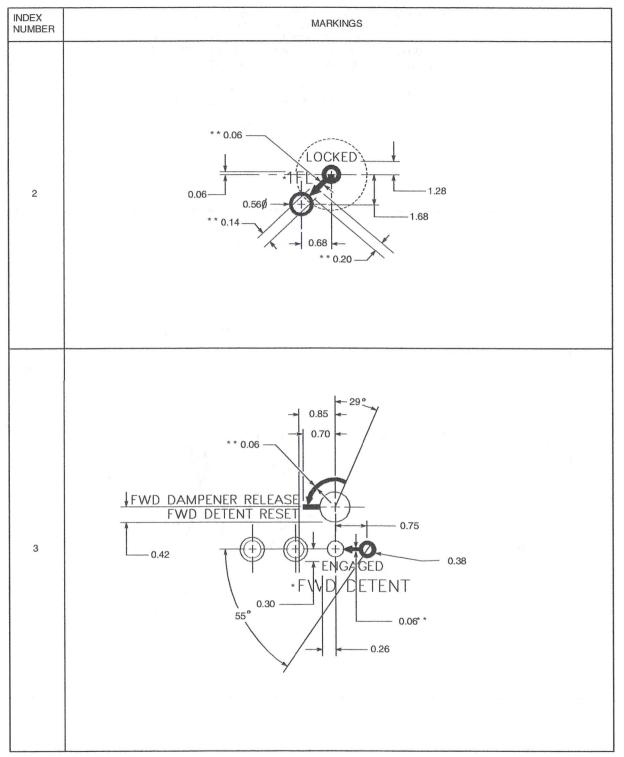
LAU-129 Guided Missile Launcher Marking. (Sheet 1 of 5)
